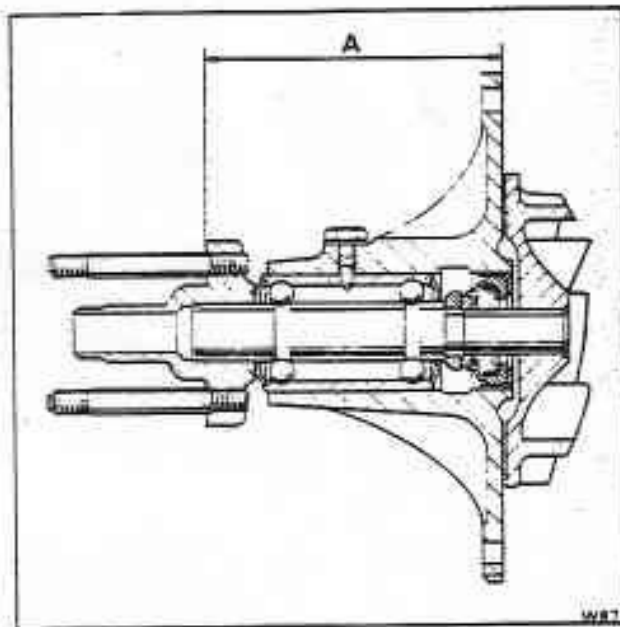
Pulley flange pressed onto shaft (Type A)
